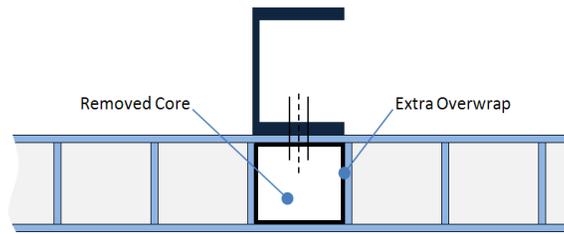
Reinforced Core Sandwich Ring Frame Joint Concept:
